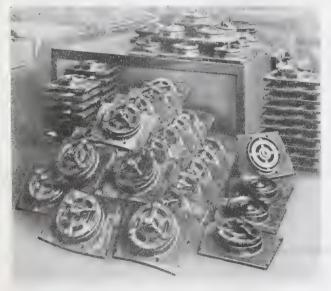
SHOWING HOW VALVES HAVE BEEN MADE TO FIT A PREVIOUS SEGMENTAL ARRANGEMENT.
